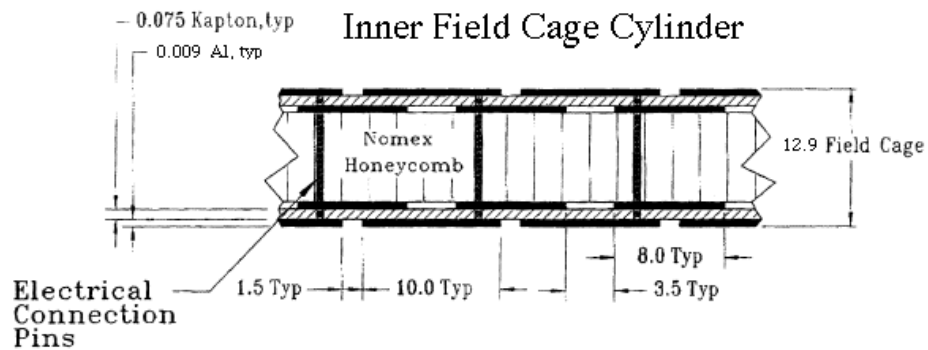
Inner Field Cage dimensions, in millimeters.
